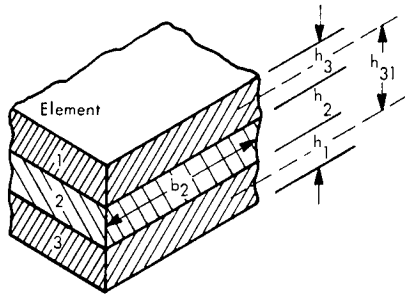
Cross Section of Typical Constrained Damping Layer
